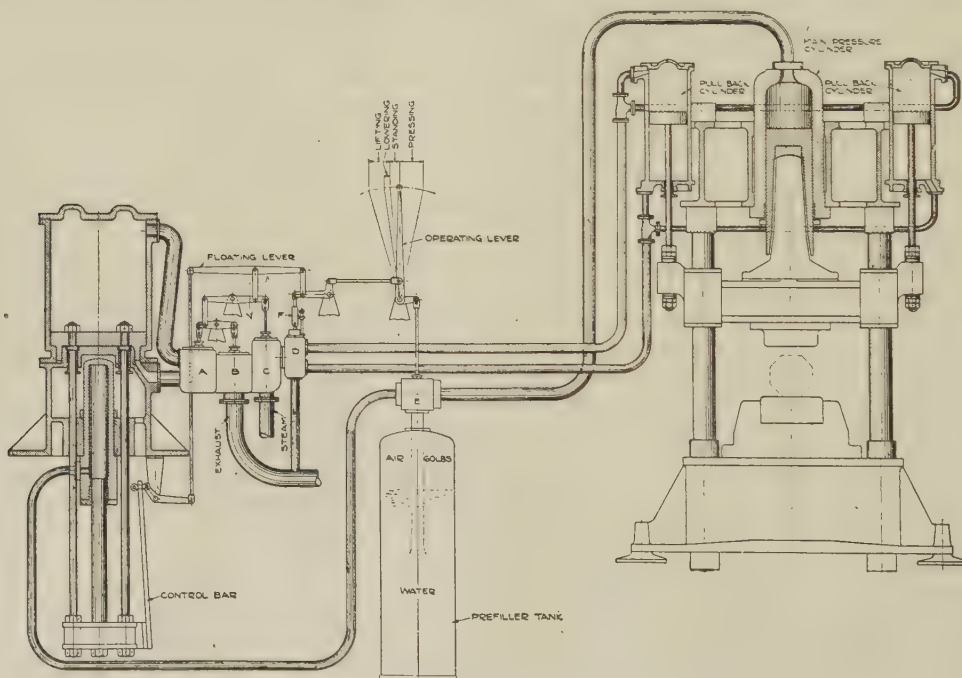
DAVY-UNITED STEAM-HYDRAULIC PRESS AND CONTROL GEAR
